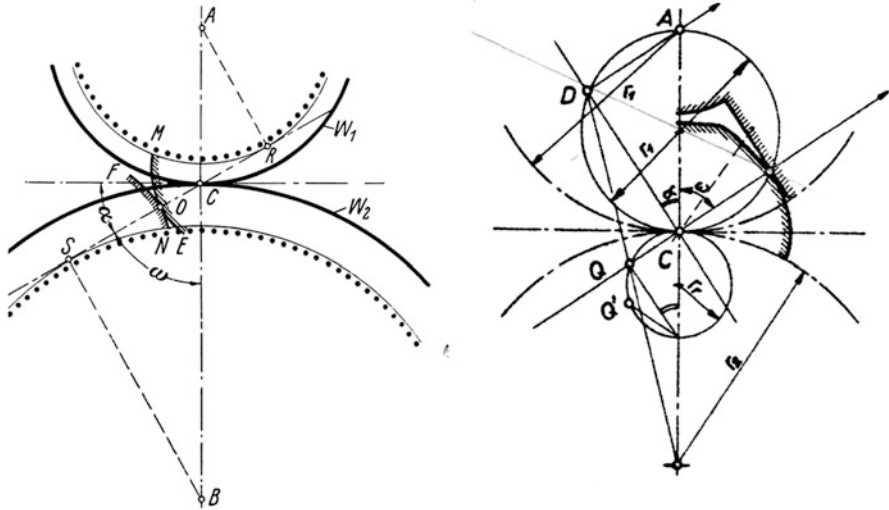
Euler’s involute gearing (left); curvature centers of teeth flanks at the contact point in the case of a cycloid pair of teeth (right)
